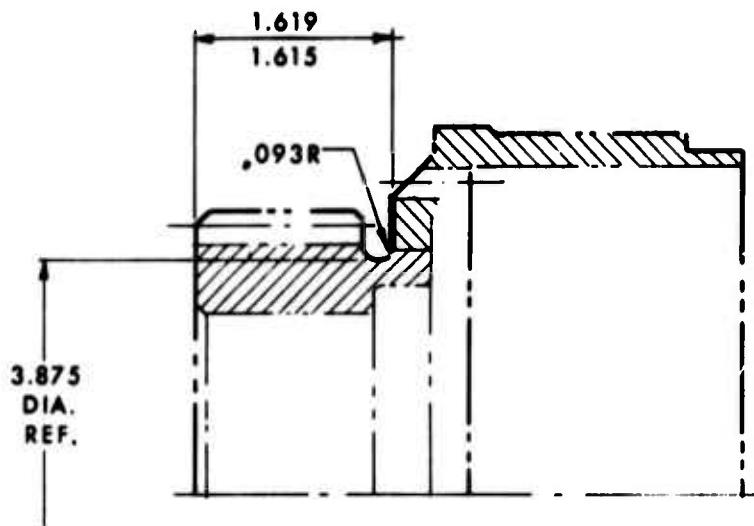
RG351-11181-057 Machine Operation Drawing.
